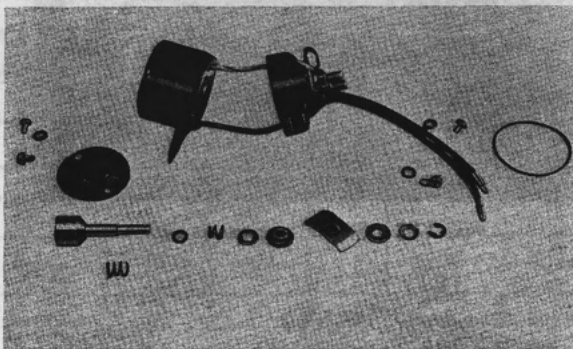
Disassembly of magnetic switch (assemble part)
